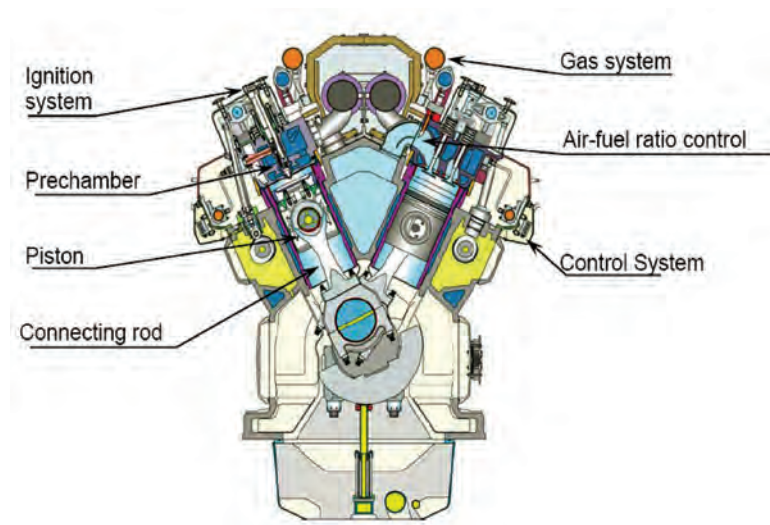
Cutaway of a typical four-stroke lean-burn engine [31].
